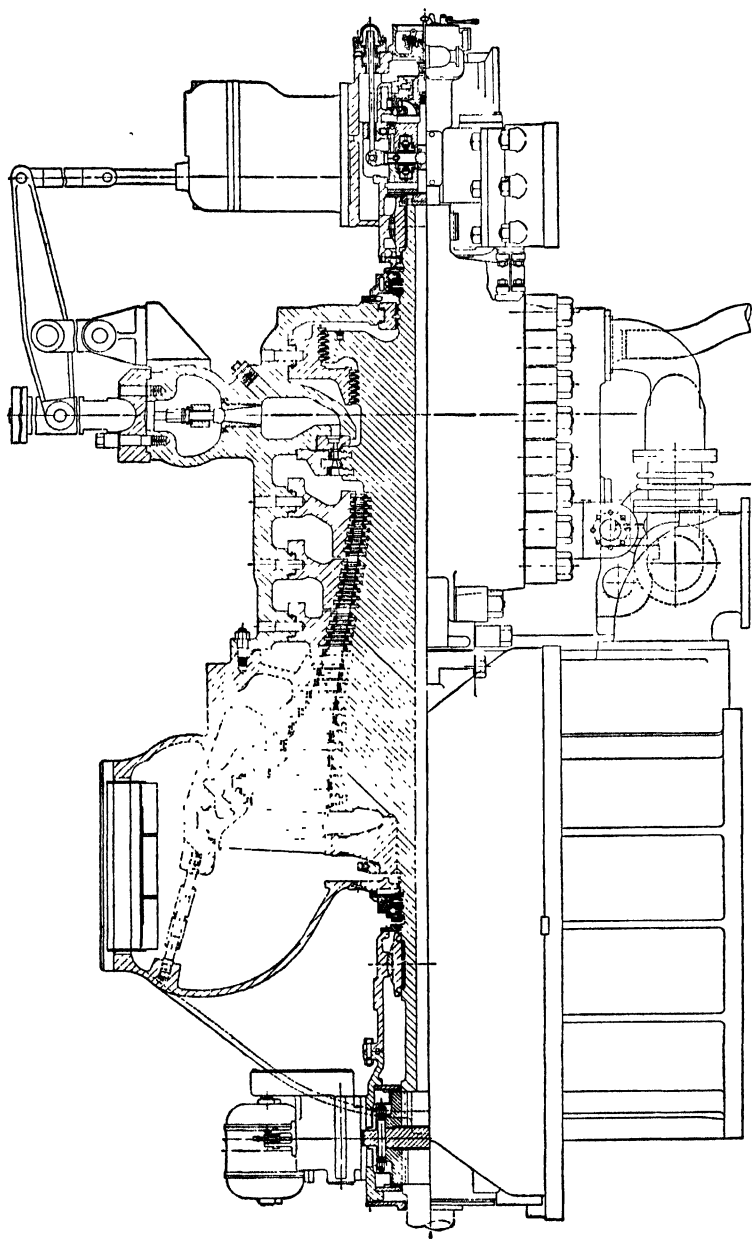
Reaction turbine, 30,000 kw-1800 rpm, single-cylinder condensing turbine; 850 psig-900 F-1.5 in. Hg; AIEE-ASME Preferred Standard. (Courtesy of Westinghouse)
